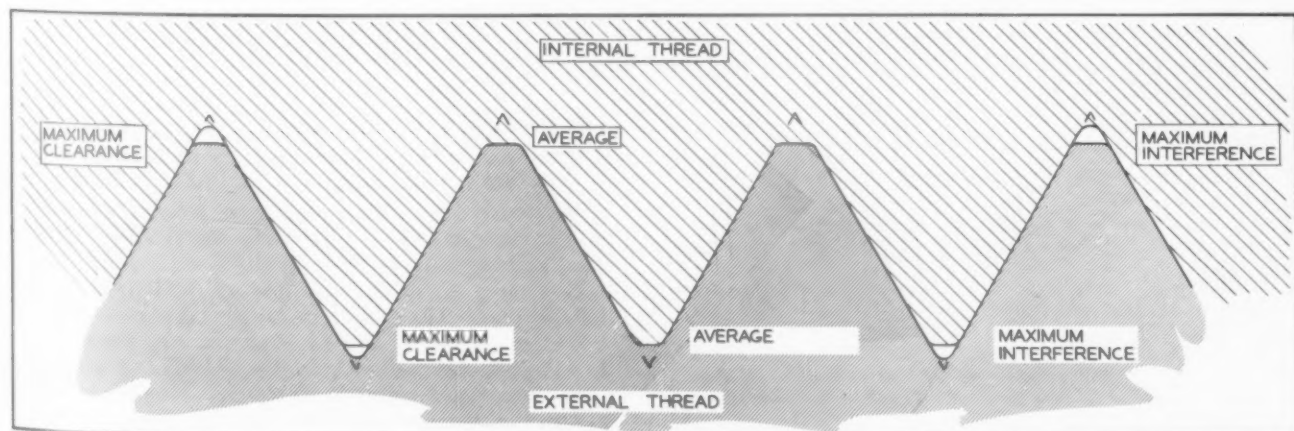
American Standard Regular Taper Pipe Thread (NPT). When joints are wrench-tight without lubricant or sealer, flanks should be in contact. Minimum truncation at root is less than maximum truncation at crest, resulting in spiral clearance which necessitates use of a sealer to prevent spiral leakage. Aeronautical specifications for truncation at root and crest are similar.
